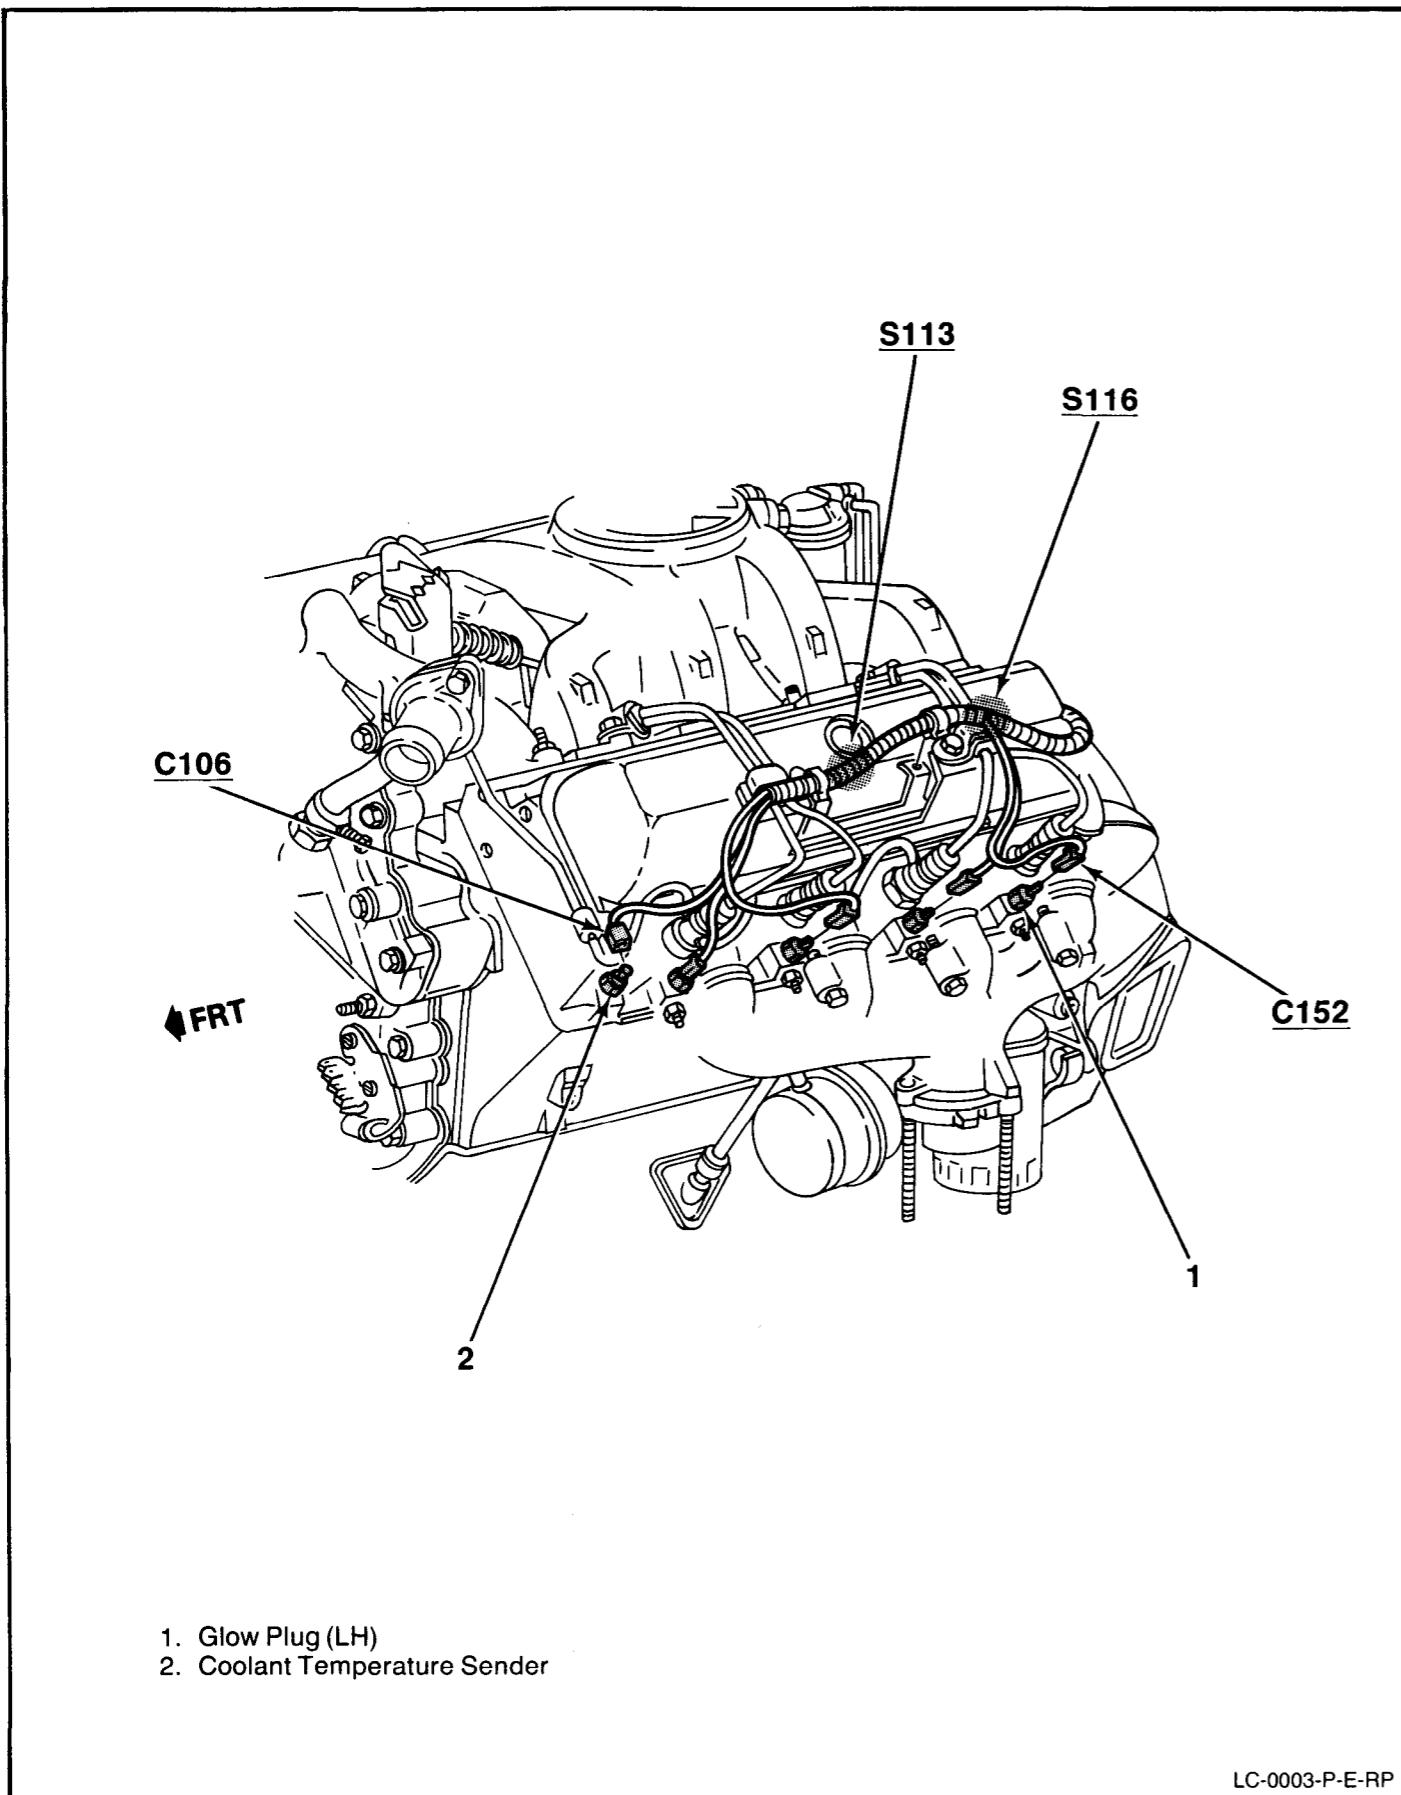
Engine Wiring Harness — Left Side (RPO LL4)
